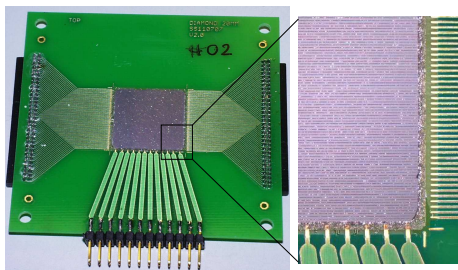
A 1" detector mounted on PCB. The insert shows the micro structures and bond wires.
